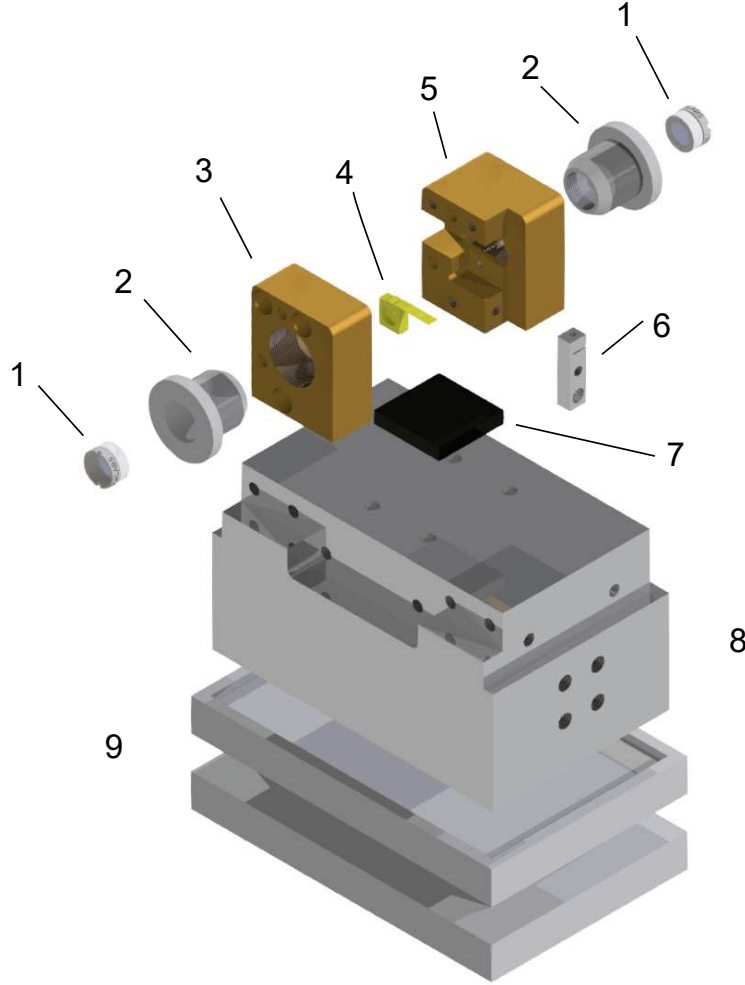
Exploded view of the tapered amplifier mounting. (1) Collimation lens. (2) Lens adjusting tube. (3) Output support. (4) Tapered amplifier chip. (5) Input support. (6) Clamper. (7) Peltier element. (8) Heat-sink. (9) Mounting base.
